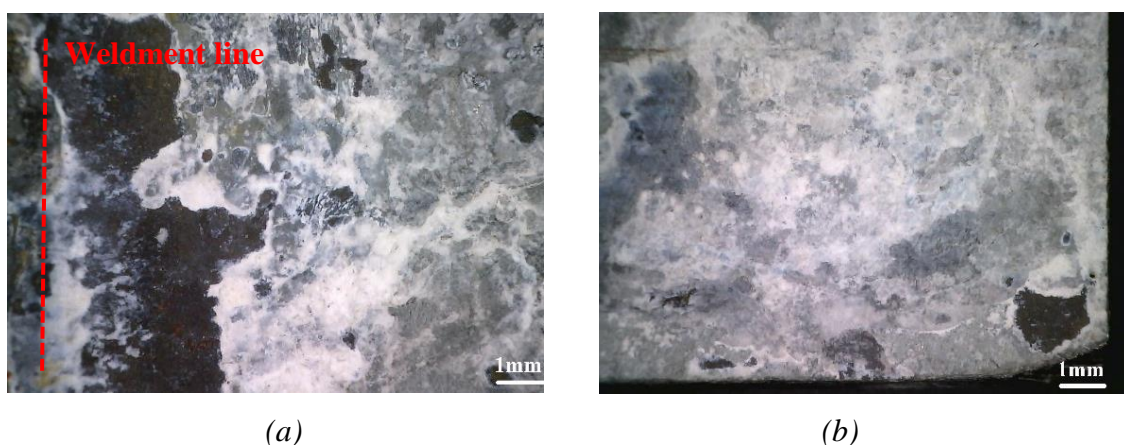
Corrosion production established on galvanized steel, (a) at weld zone, (b) at edges of galvanized steel.
